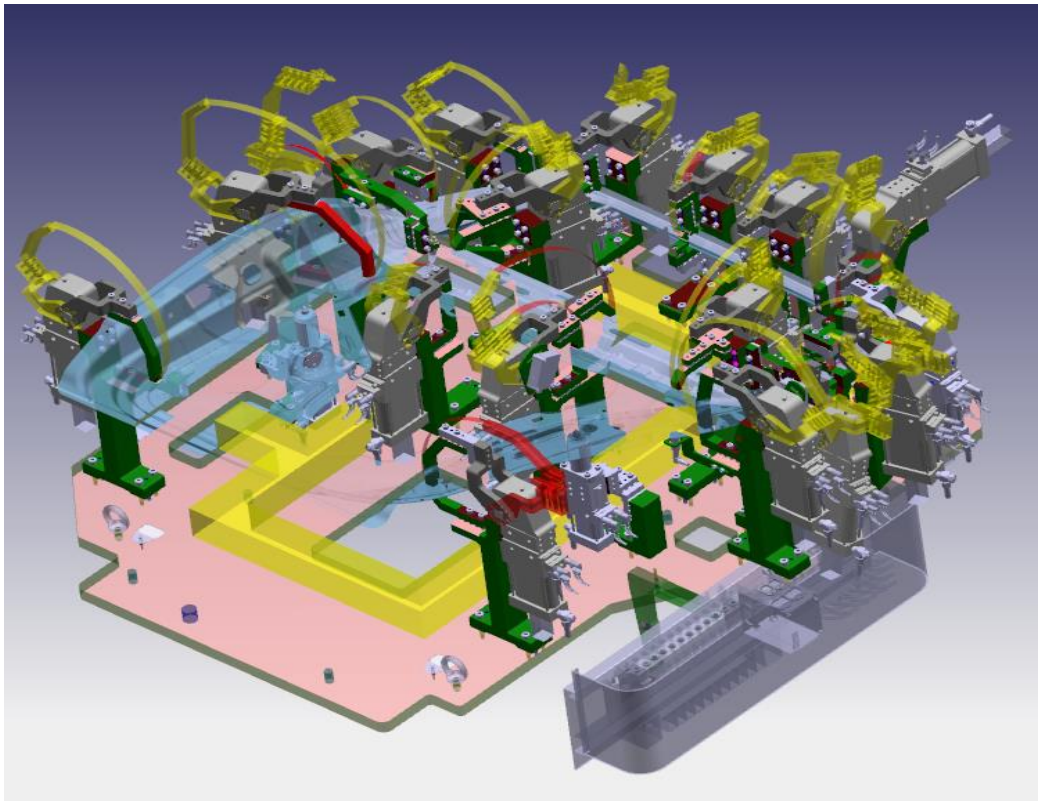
3D image of a rear door fixture with a door sheet metal.
